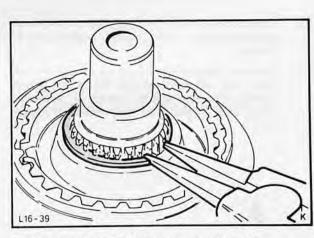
Fit circlip to 3rd/4th gear synchroniser hub
